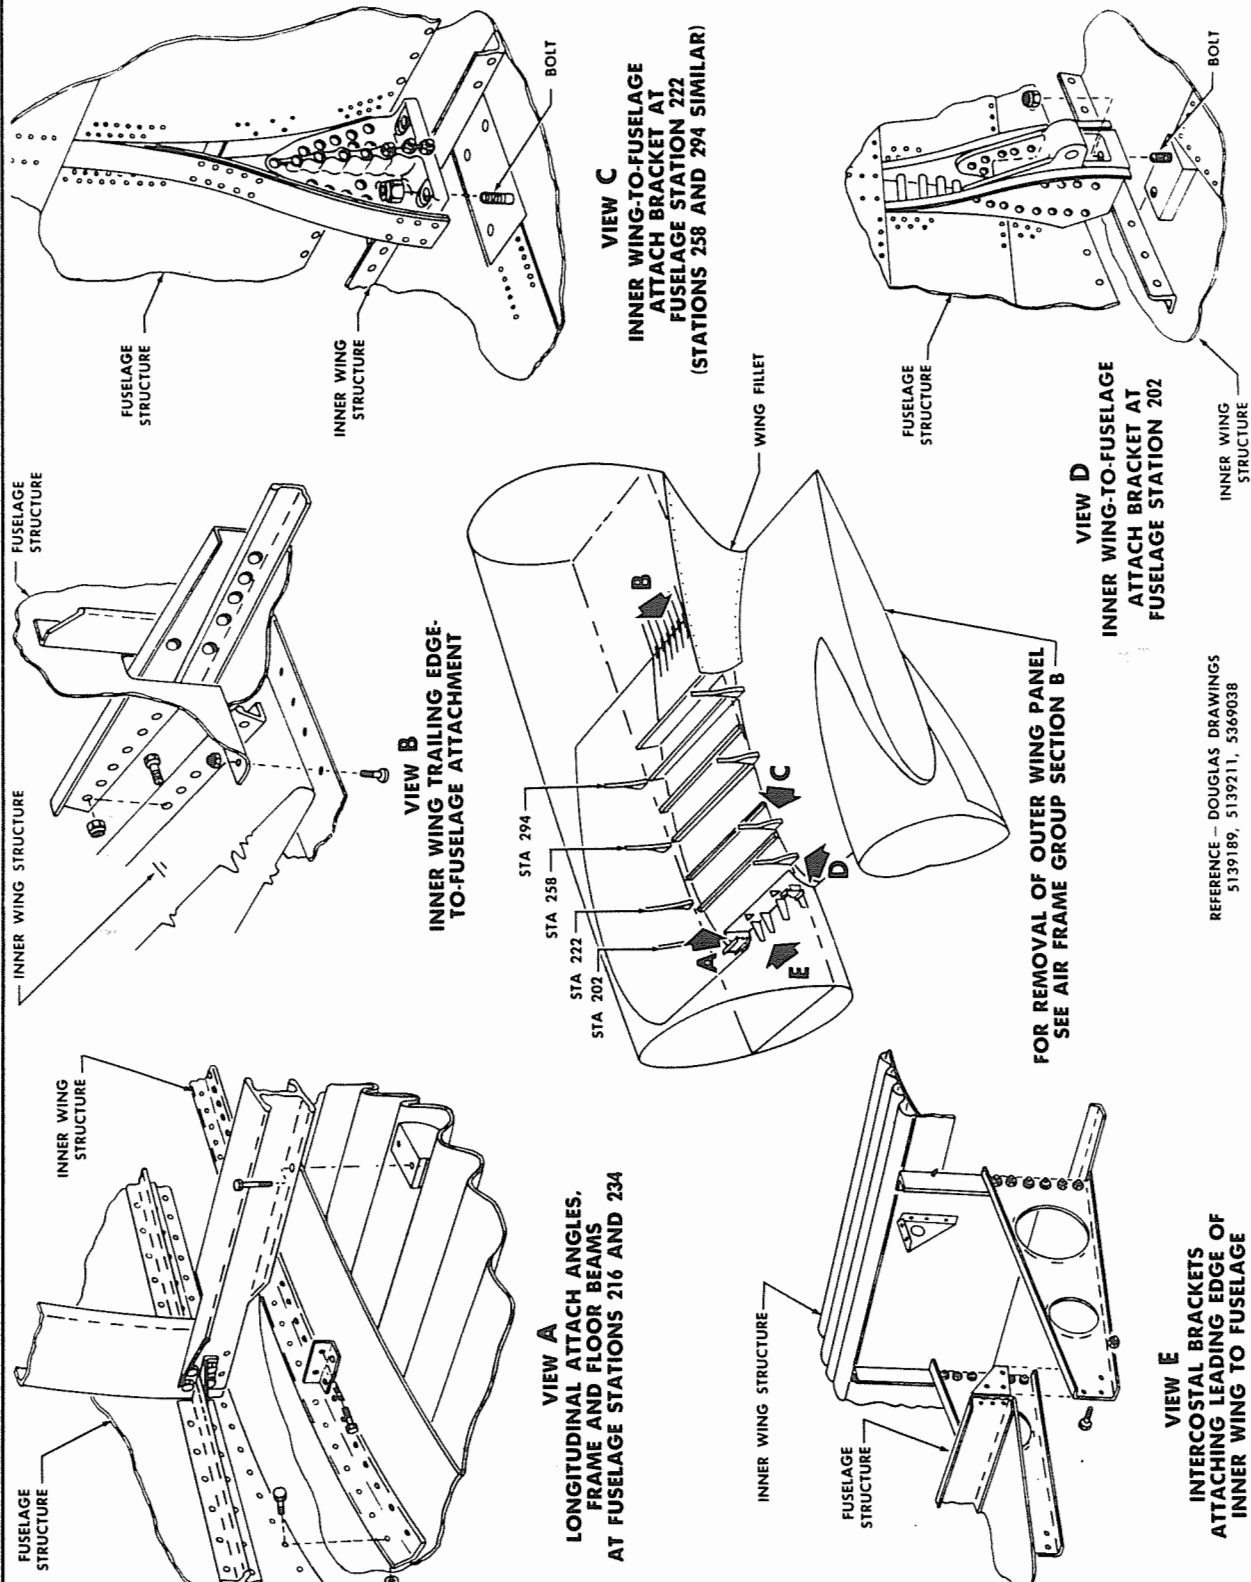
(Sheet 1 of 2 Sheets). Wing Center Section Installation
